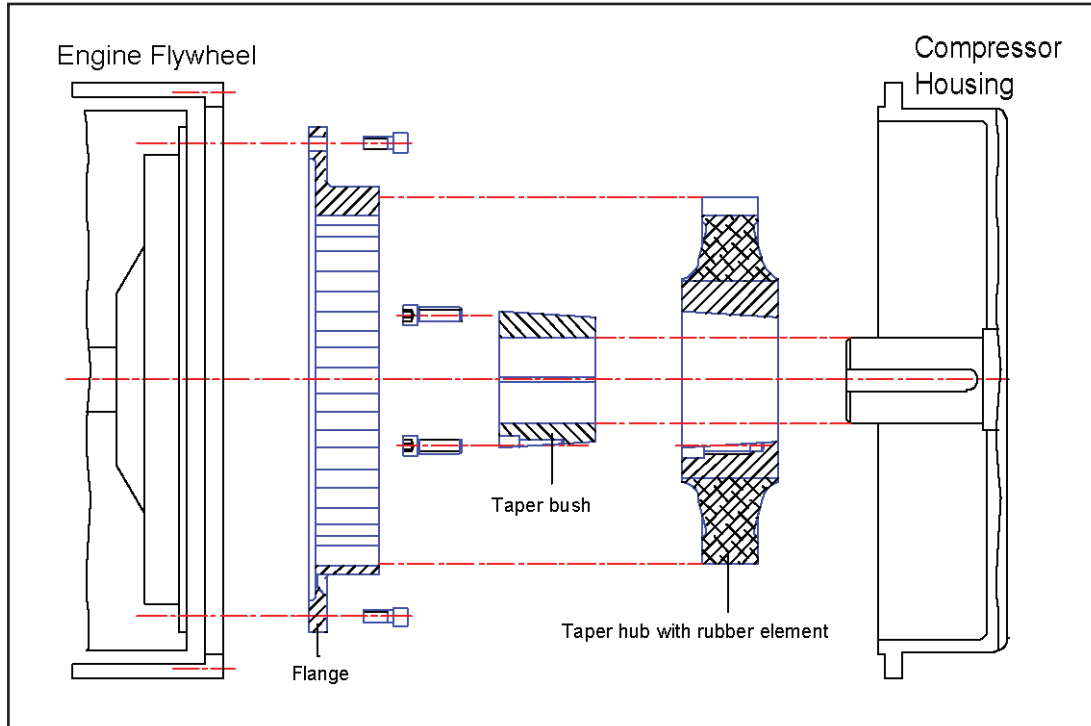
Flywheel Coupling with Taper-Loc Bushing Components
